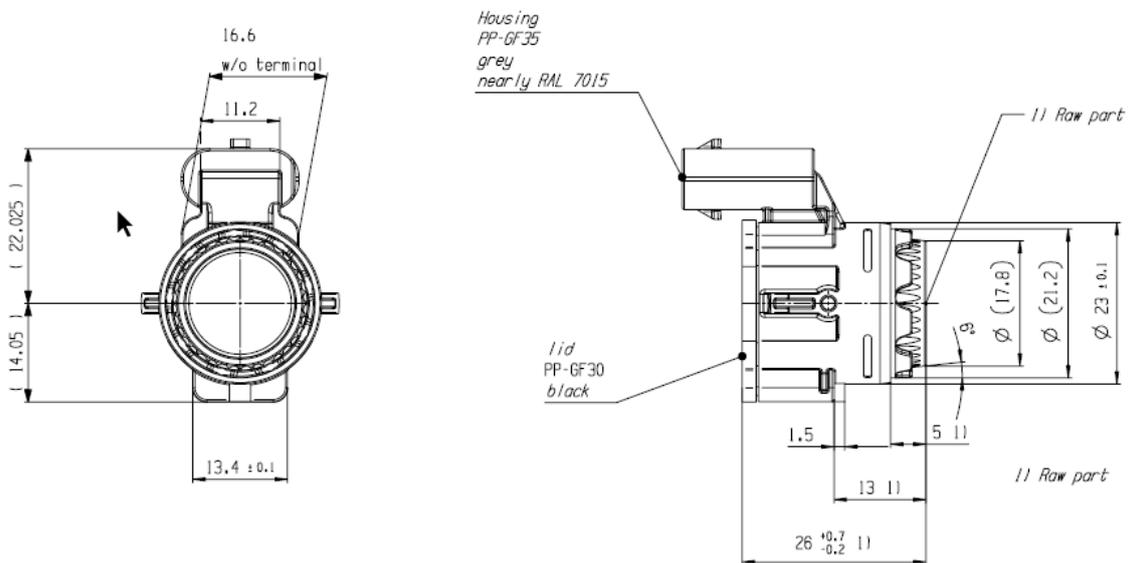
Sensor dimensions with axial connector (taken from drawing)
